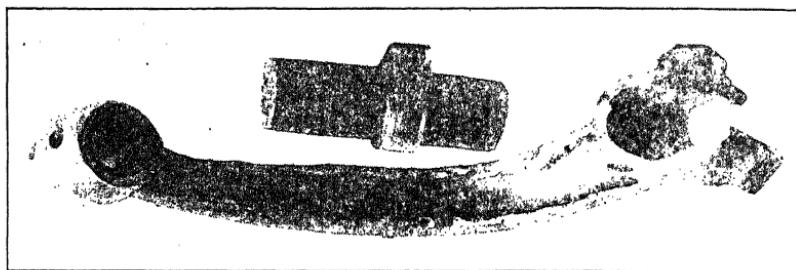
Failure of a Rod Bearing Has Wrecked Many an Engine
